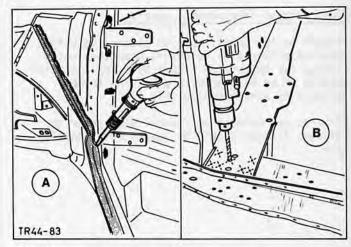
A - Remove panel remnants using pneumatic power chisel B - Drill spot welds
